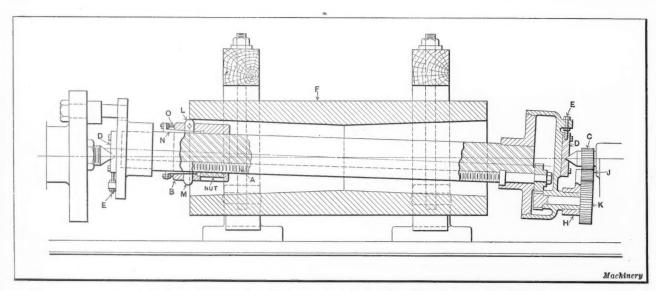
Taper Boring Device mounted on Lathe in Position for boring Double Taper in Bushing
